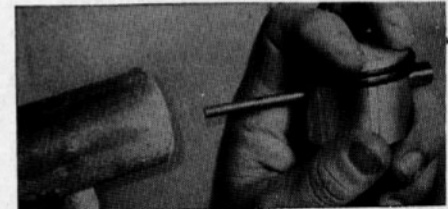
After removing snap rings, the piston pin can be tapped out using a 3/16-inch rod as shown or, on pistons with Spirol pin at exhaust side, by driving piston pin out with slotted driver (Homelite tool No. 23949).
